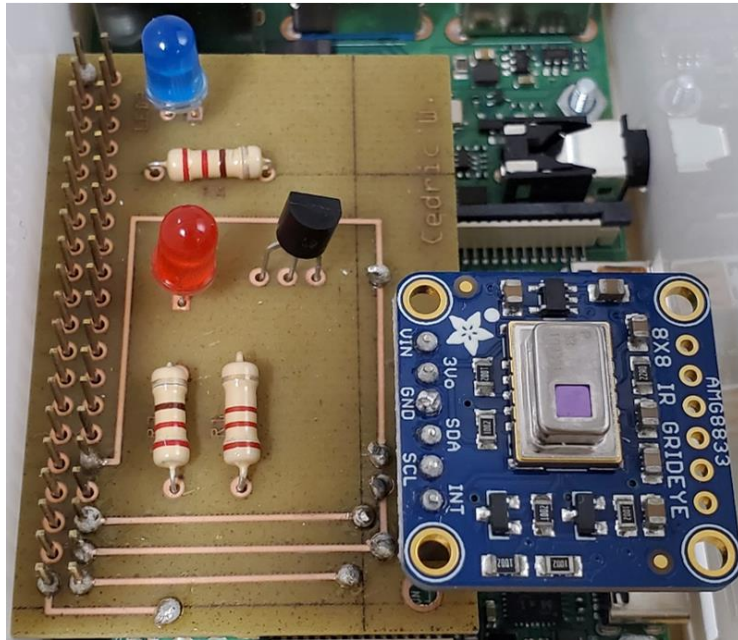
PCB version 2 with AMG8833 IR Grid Eye sensor connected
